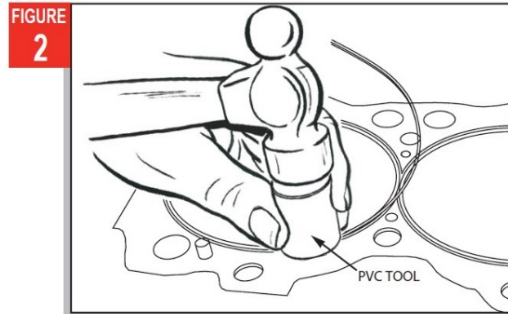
Seat the wire using the PVC tool provided. This will evenly distribute hammer blows and prevent flattening the wire.
